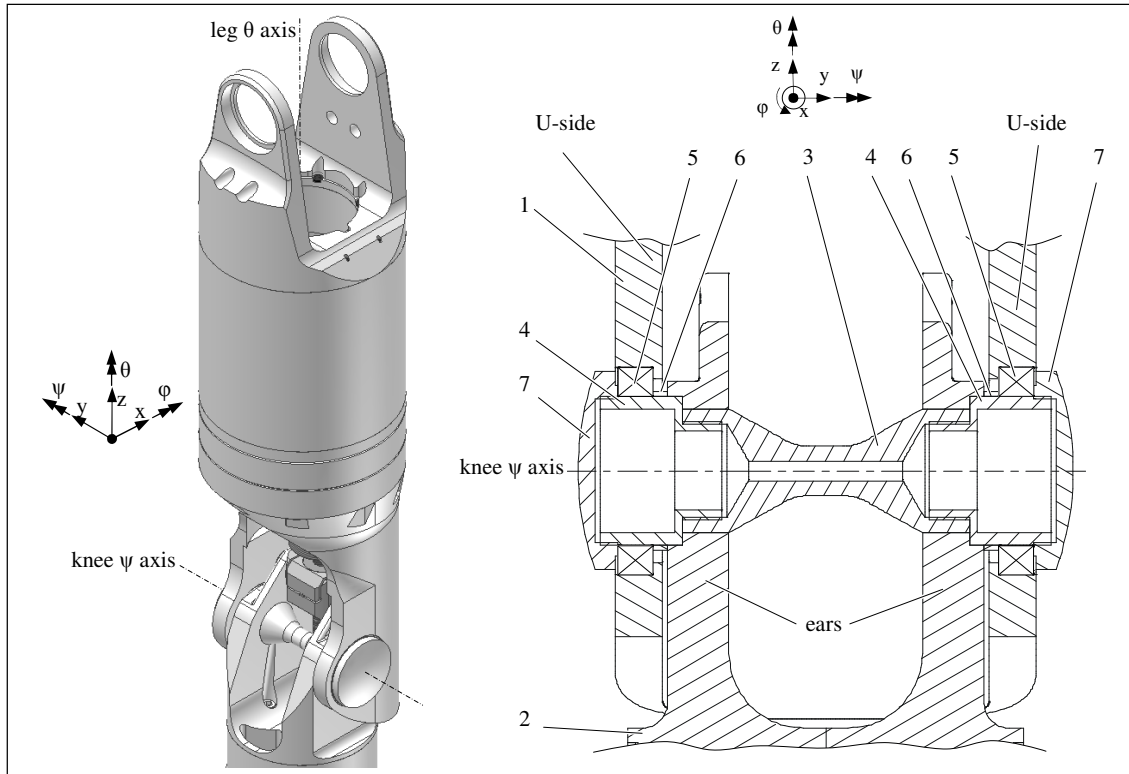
Posterior view of knee joint (left). Section view of knee joint, actuation made invisible (right); U-shaped cross section upper leg knee connector (1) with, lower leg knee connector with 'ears' (2), axle (3), insert stops (4), single row deep groove ball bearings (5), distance rings (6) and knee caps (7).
